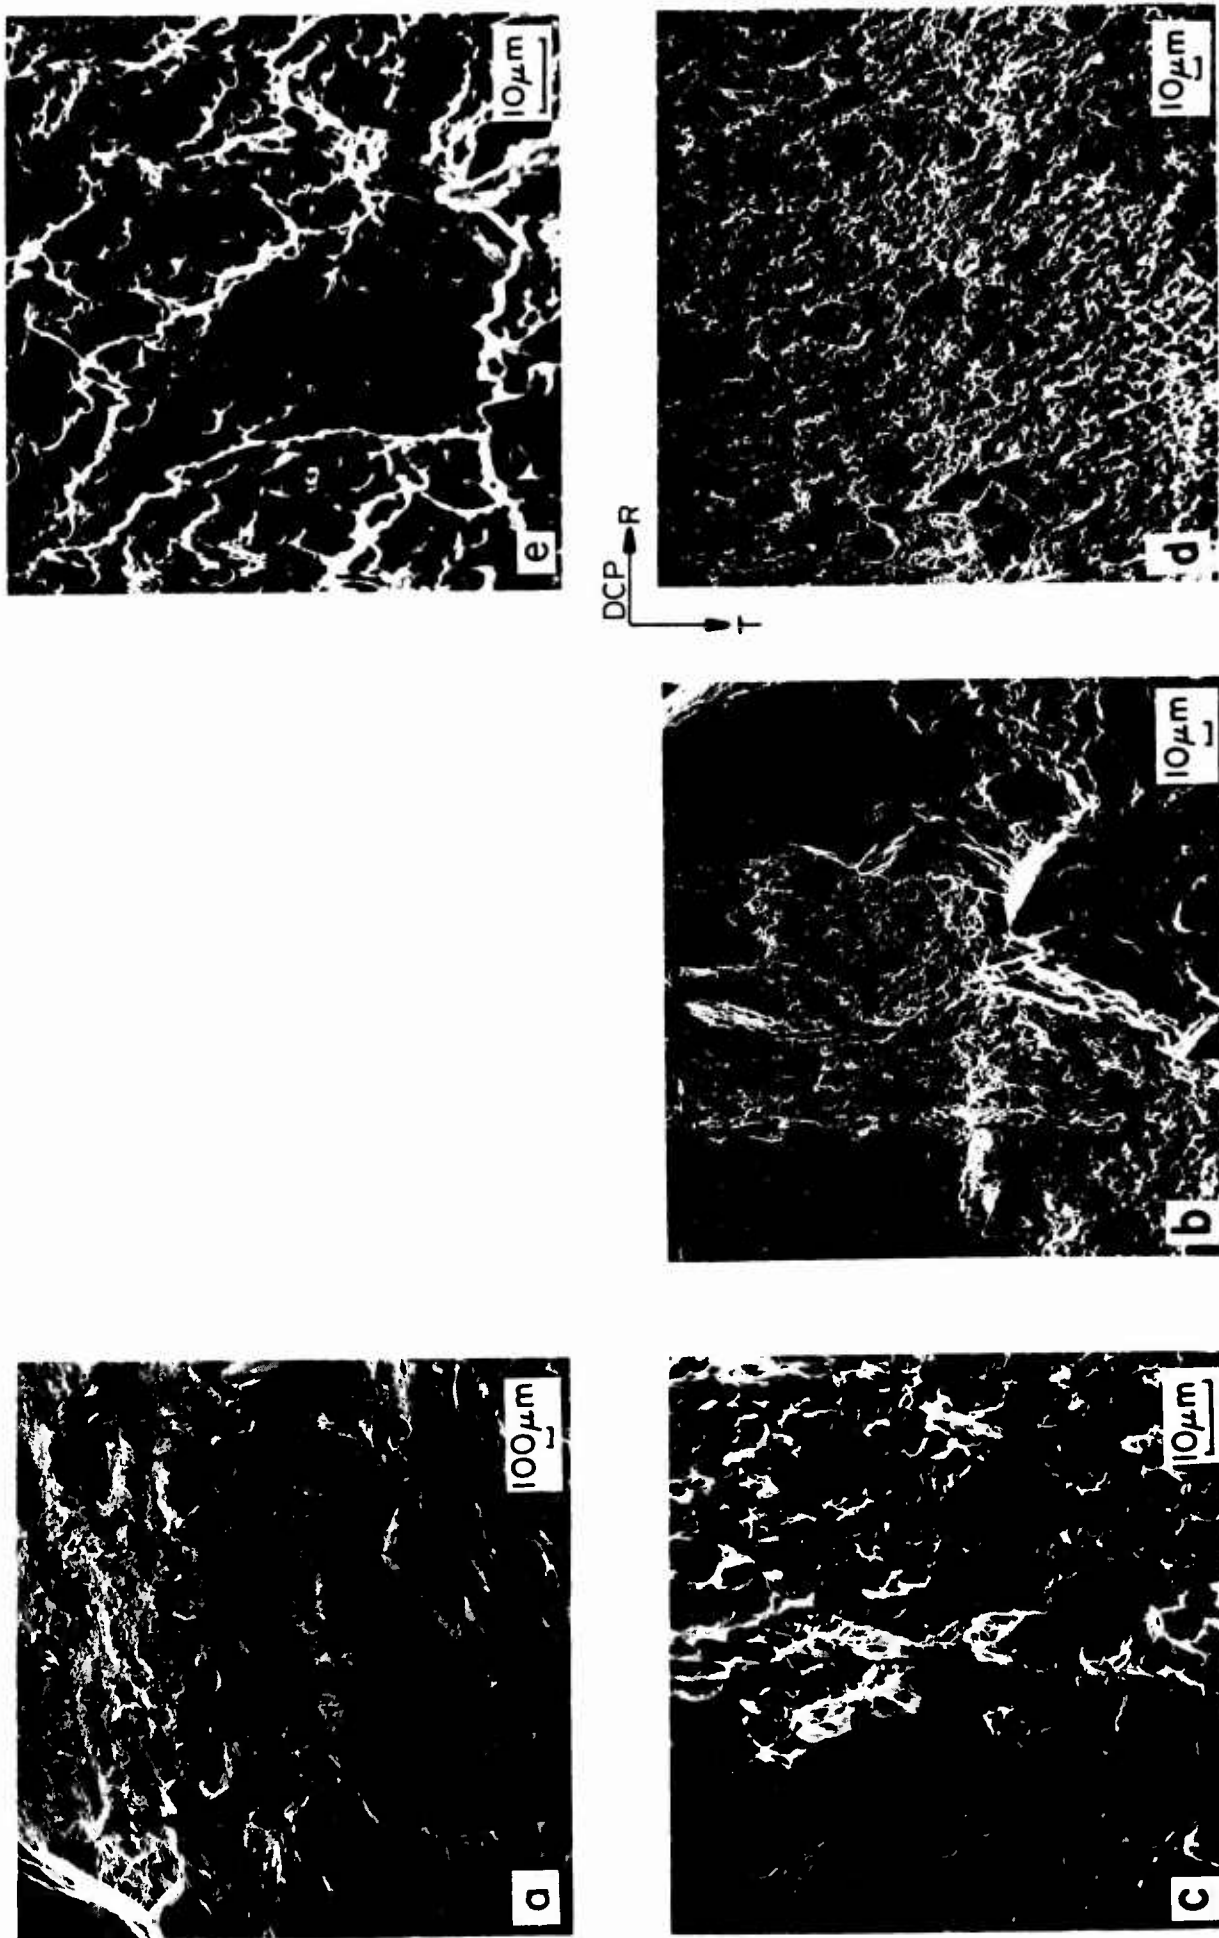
Alloy 253, sample 3ELR10. SEM of fracture surface (a) X25, (b) X300, (c) X1000-
